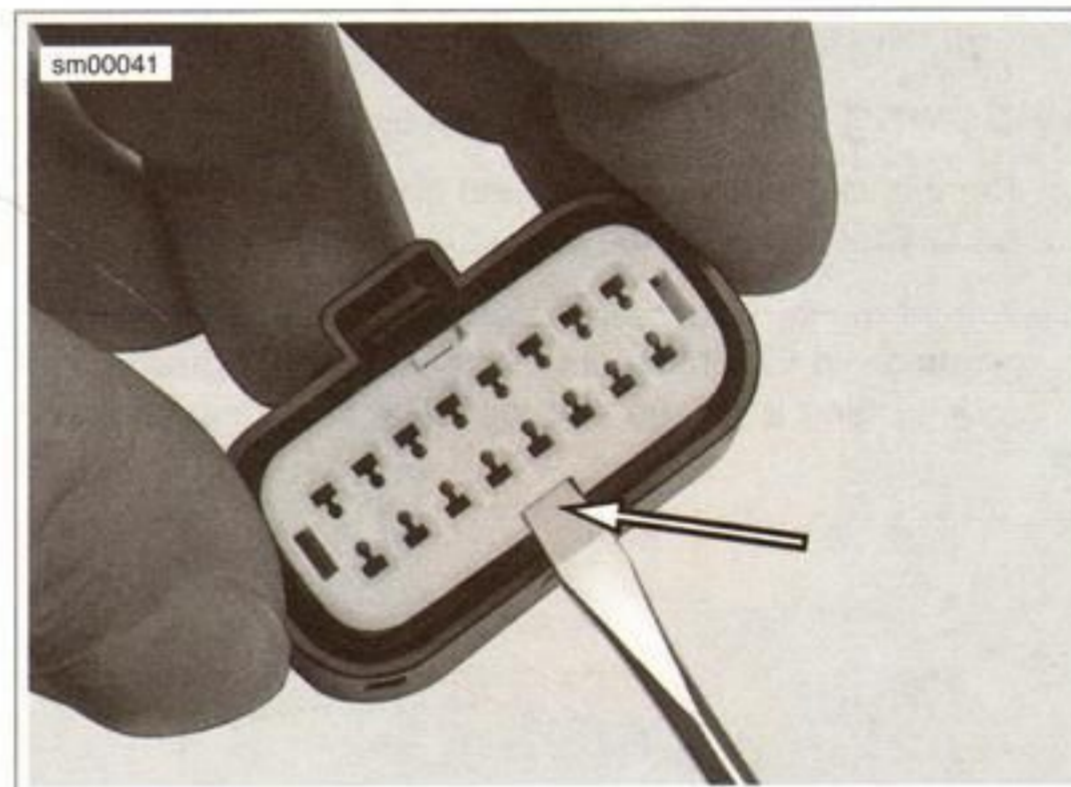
Molex Connector: Secondary Lock Pry Slot (Socket Housing)
